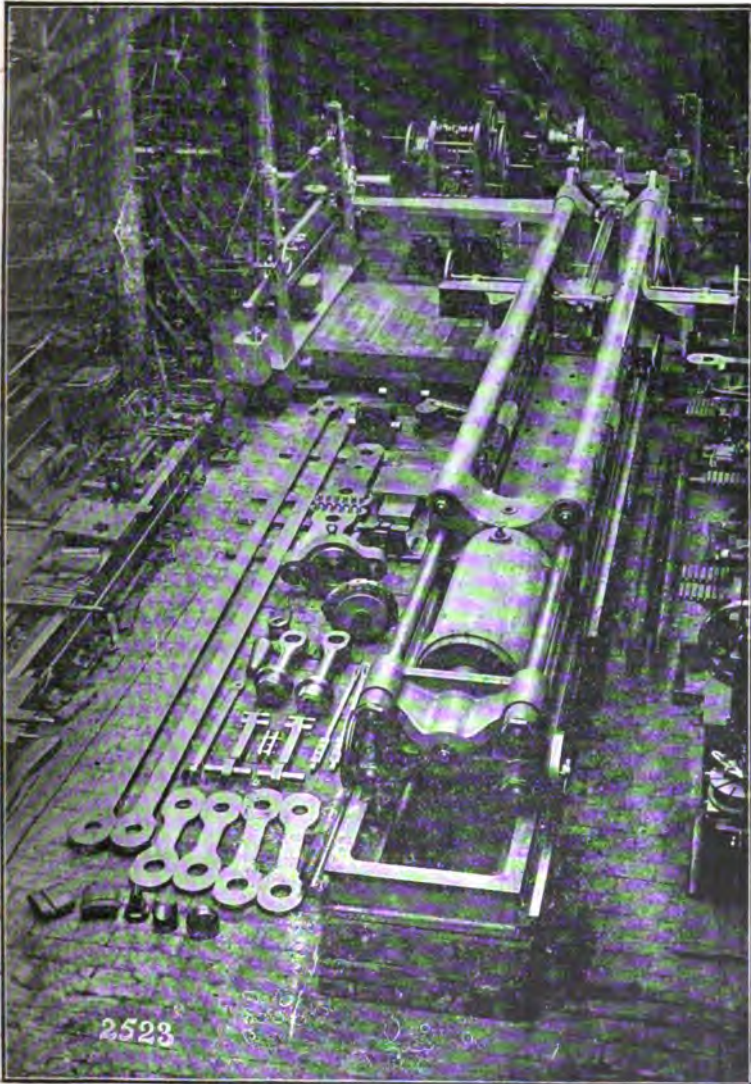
The 1,000,000lb. Testing Machine, made for Mr. Kirkaldy.
